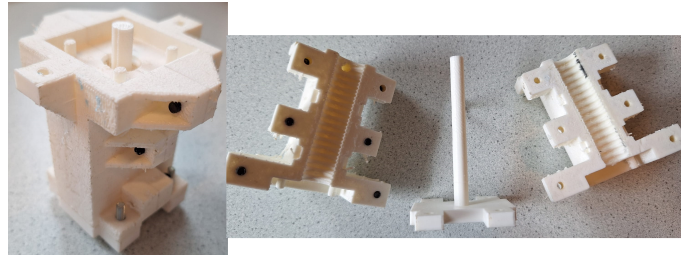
First mould put together and apart. Clearly showing the grooves in the right picture.
